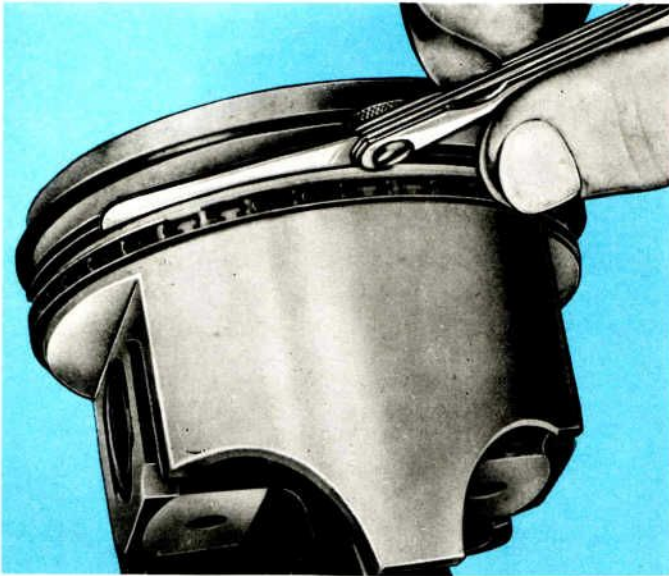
MEASURING PISTON RING SIDE CLEARANCE
